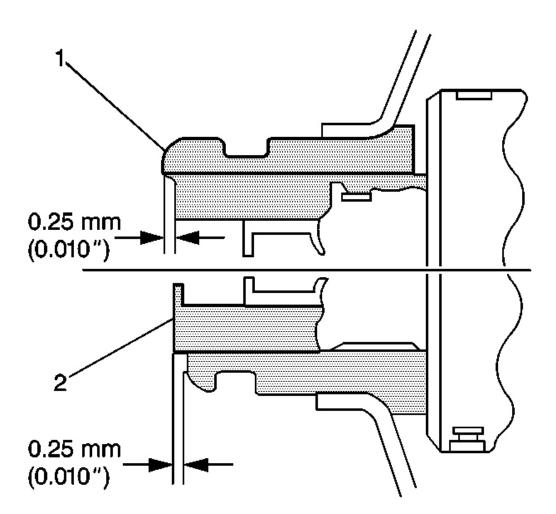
Checking Power Steering Pump Pulley Installed Depth Courtesy of GENERAL MOTORS CORP.
